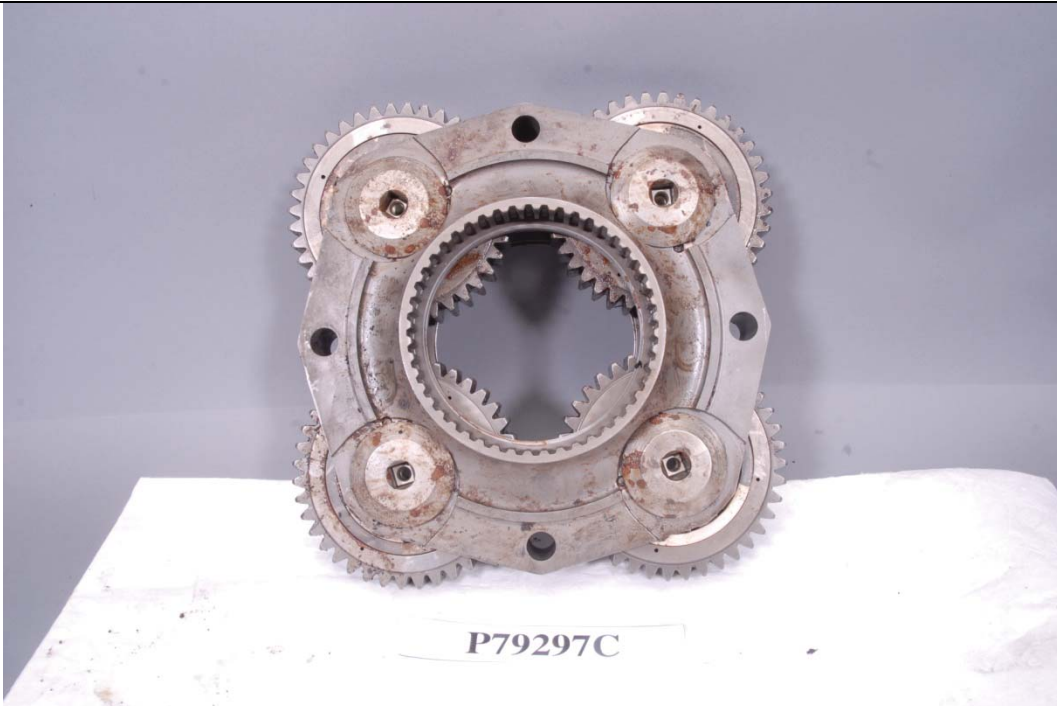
P-79297C, Propeller Shaft Oil Jet
